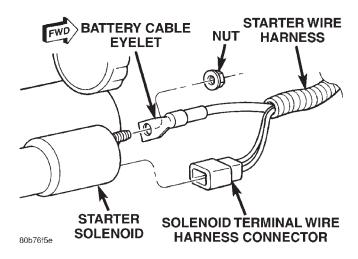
Starter Wire Harness Remove/Install - 4.0L Engine
